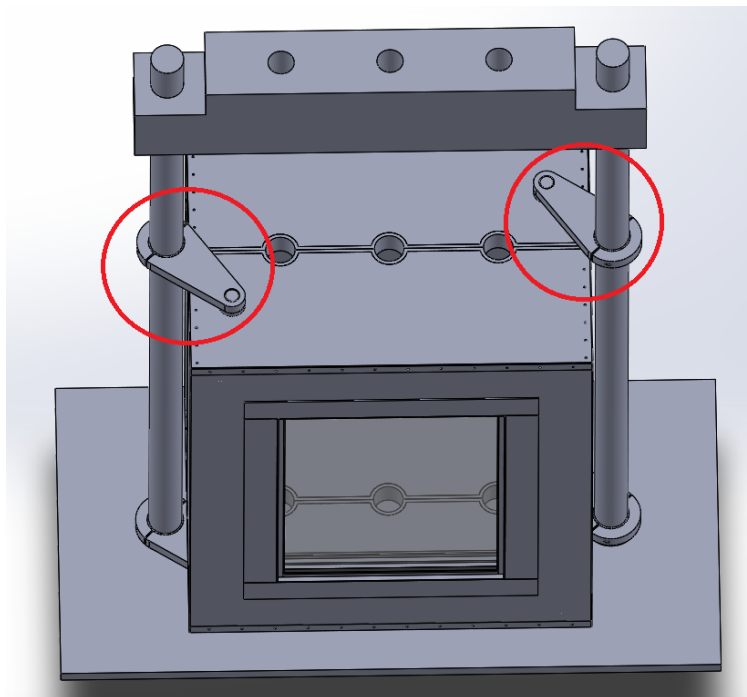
Components responsible for the attachment between the chamber and the creep testing machine.
